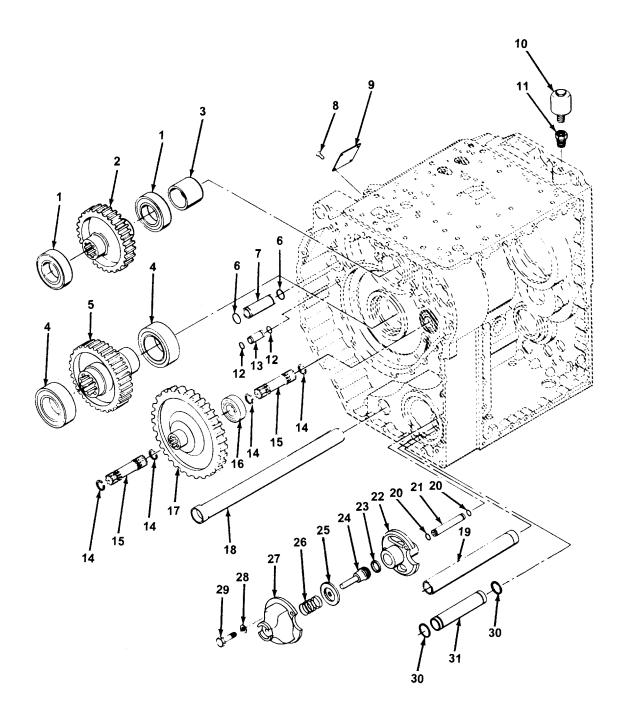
Output Drive Gear and Steer Shaft Drive Gear.
